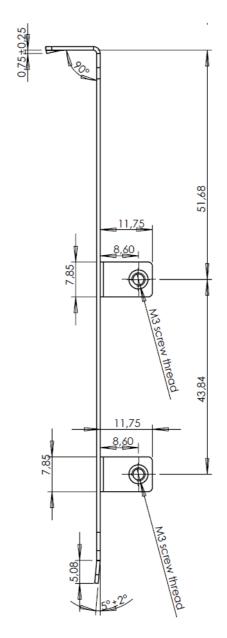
Dimensions Front Panel CIFX 50-2ASM, CIFX 50E-2ASM
